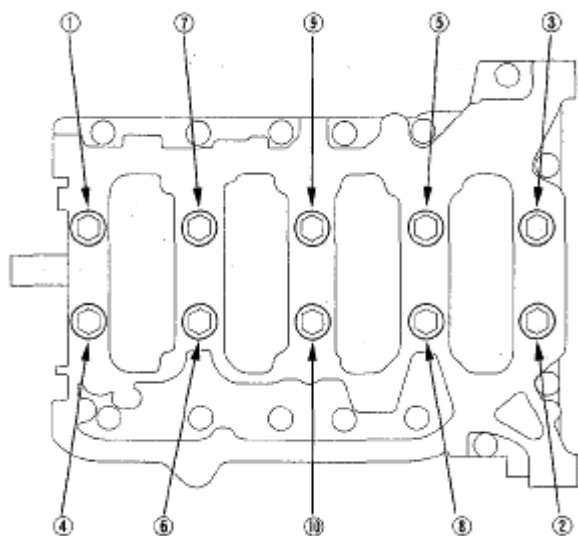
Identifying Bearing Cap Bolt Loosening Sequence
